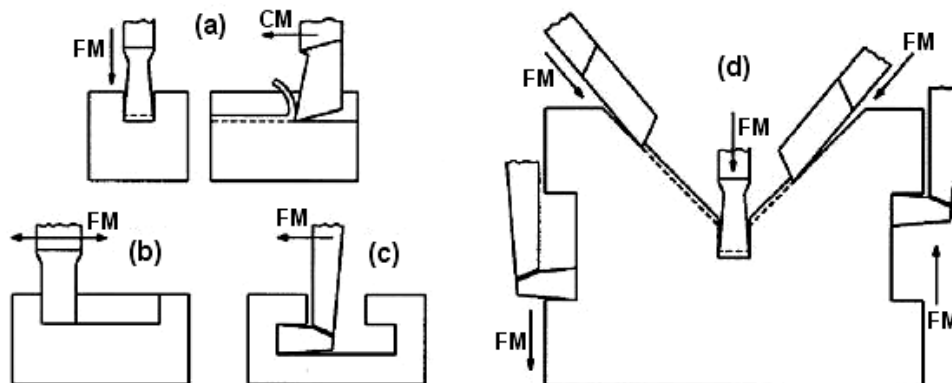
Machining (a) Slot (b) Pocket (c) T-slot and (d) V-block in a shaper
